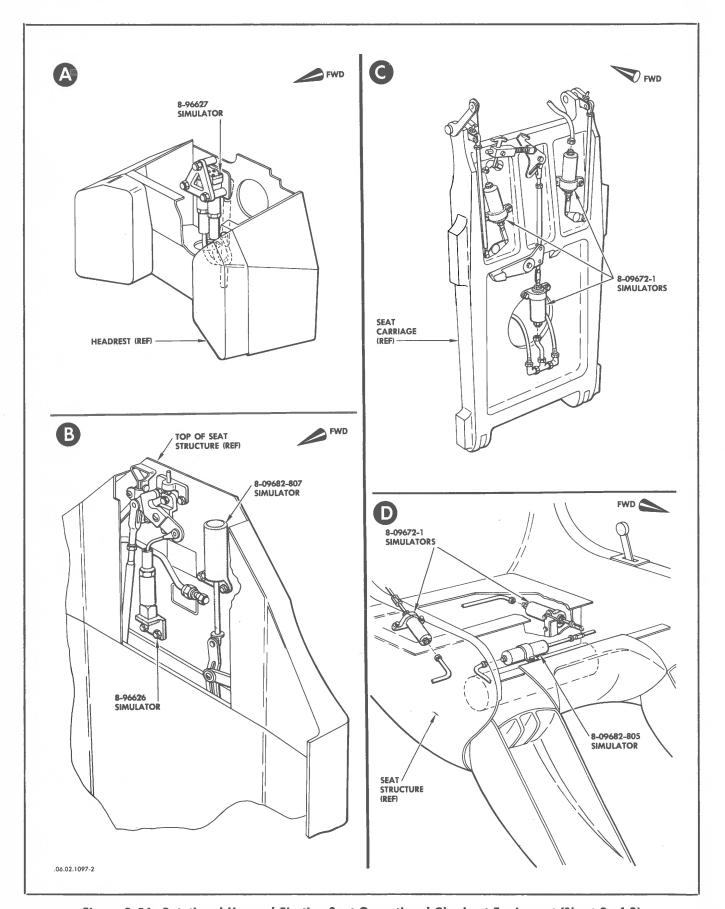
Rotational Upward Ejection Seat Operational Checkout Equipment (Sheet 2 of 3)
